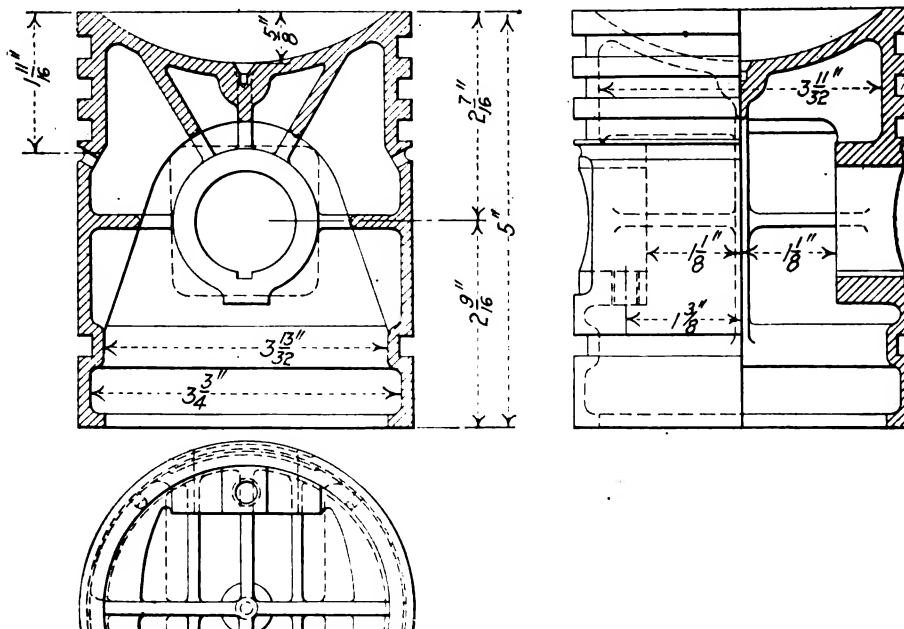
PLAN VIEW AND ELEVATIONS PARTLY IN SECTION OF THE STANDARD PISTON USED BY THE FIFTH AVENUE COACH CO.
